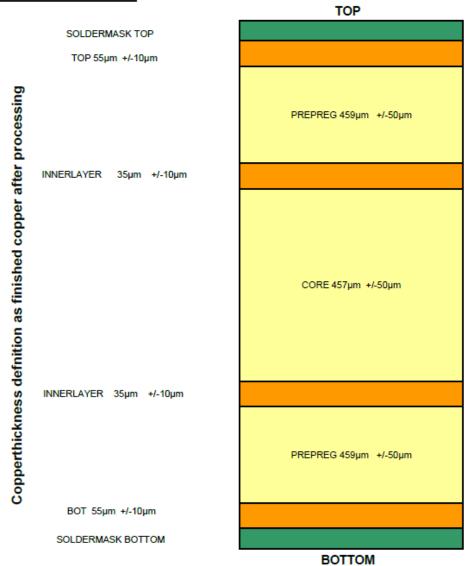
Recommended PCB stack-up information for use while integrating CUW module.
